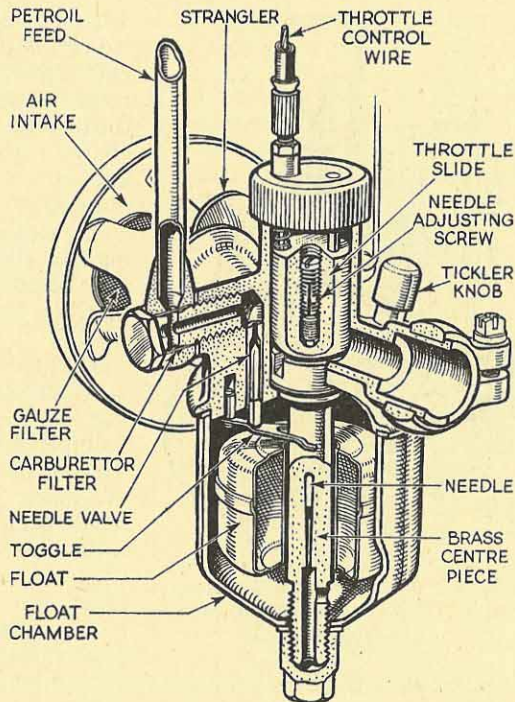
Detail construction of the Villiers carburettor fitted to nearly all autocycle engines
